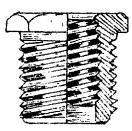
Galvanized Pipe Reducing Bushing 3/4" to 1/2"
